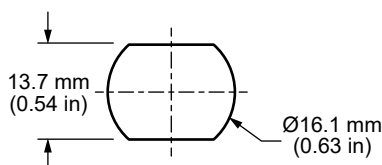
ANT-8/9-SPNF1 Mounting Hole Dimensions
